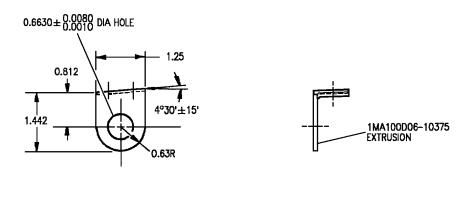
Transmission Seal Assembly, 74A190678, Replacement (Sheet 2)
